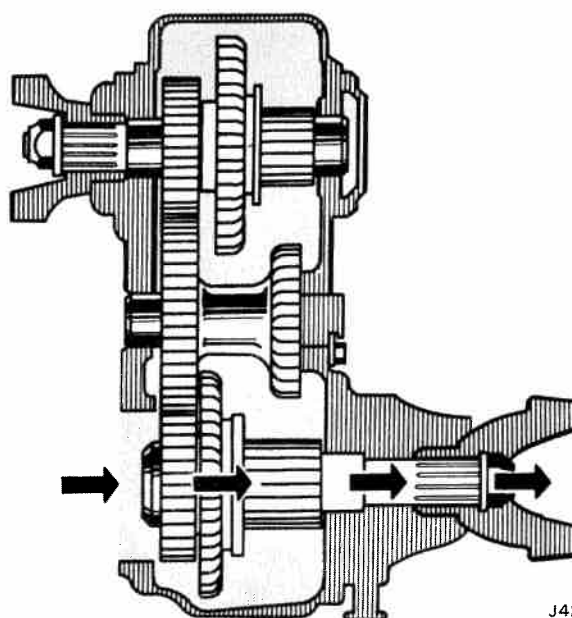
Silent Transfer Case in 4-Wheel Drive
